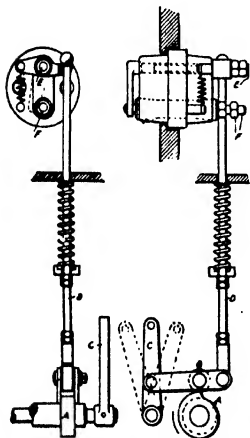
Bosch Mechanical Make-and-Break Igniter
